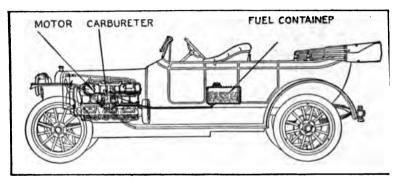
Fuel System in which Gasoline Tank is carried Under Fron Seat.
